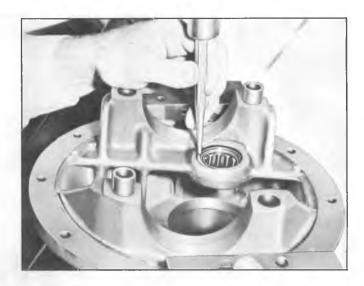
F--Pinion Rear Bearing Removal (Except 11,000 Lb.)
